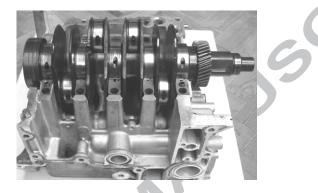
Boxer crankshaft placed on the bedplate and into the half block's motor.
